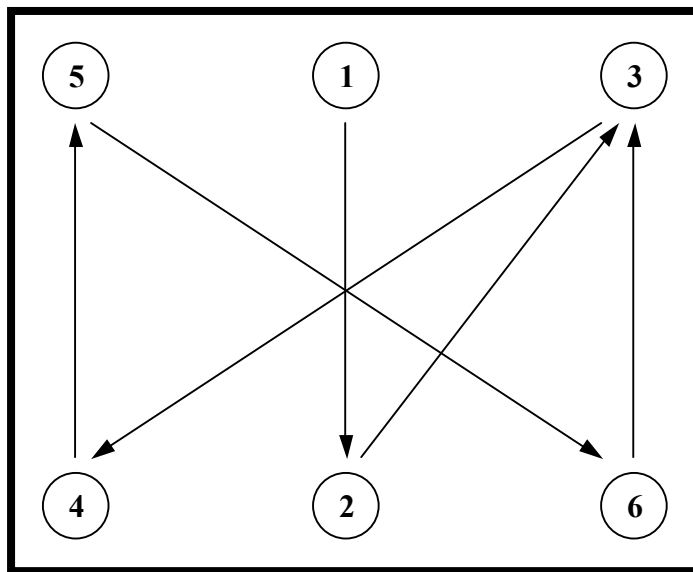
Tightening order of mounting screws for HVIGBT (6 points tightening module)
